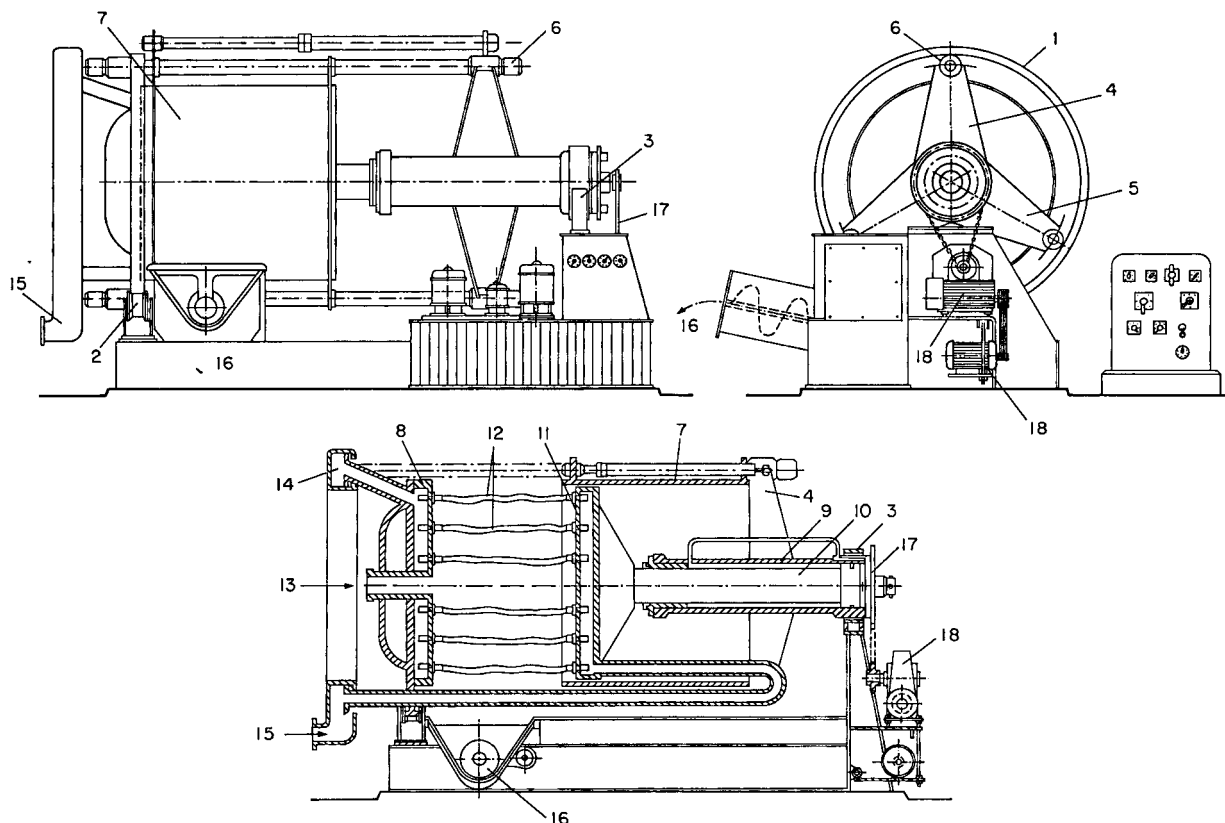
Diagram of a Bücher-Guyer type HP-5000 press (Mroźewski and Chwiej, 1969). 1, indicates a horizontal rotary basket; 2, rolls; 3, ball bearing; 4 and 5, resistance blocks; 6, turnbuckles; 7, pressure-resisting shell; 8, pressure plate; 9, cylinder; 10, piston; 11, pressing plate; 12, draining system; 13, feeding; 14, juice collector; 15, juice outlet; 16, pomace worm; 17, drive of basket; and 18, electric motor.
